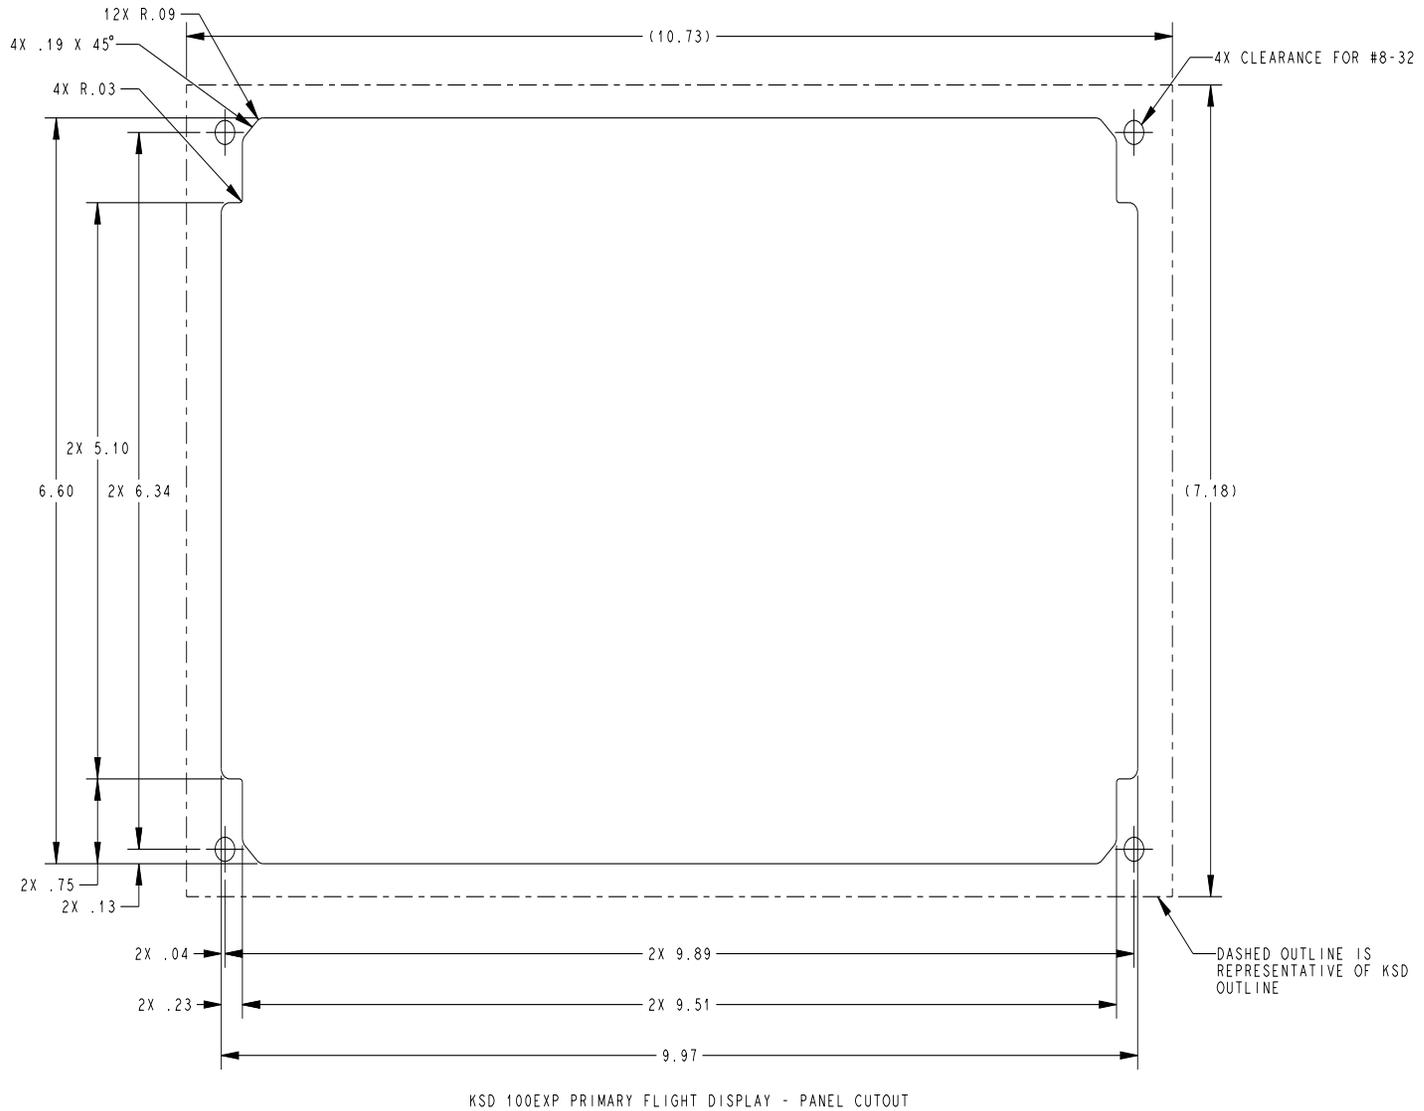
KSD 100EXP Panel Cutout Dimensions
